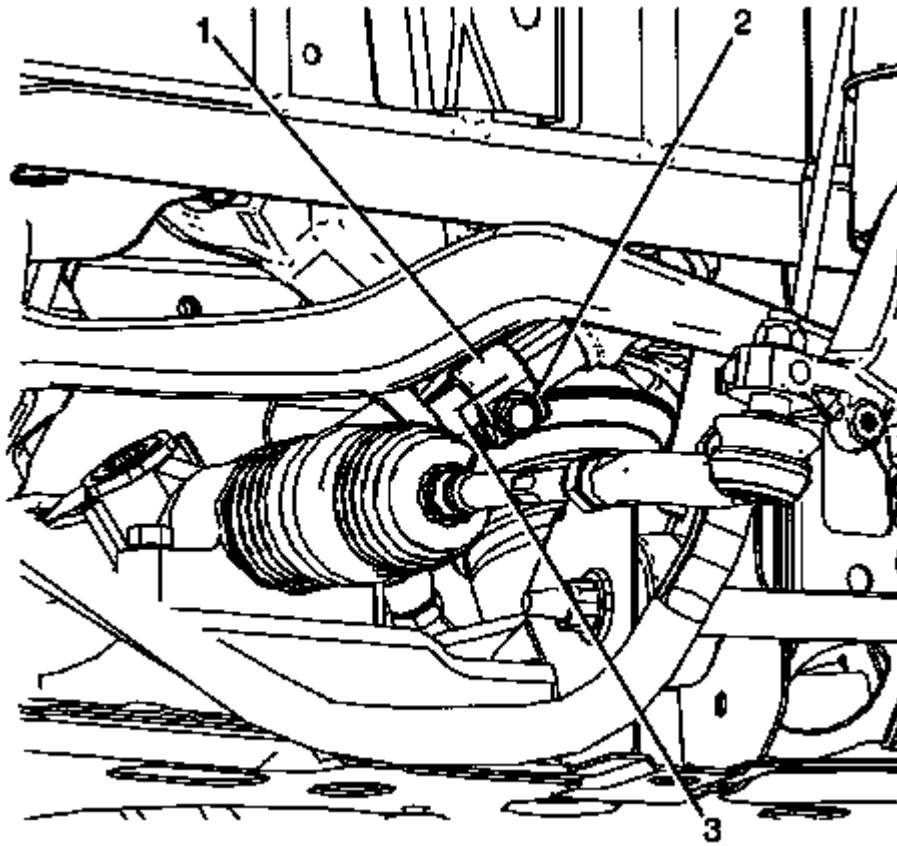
Identifying Intermediate Steering Shaft To Pinion Shaft Retaining Bolt
